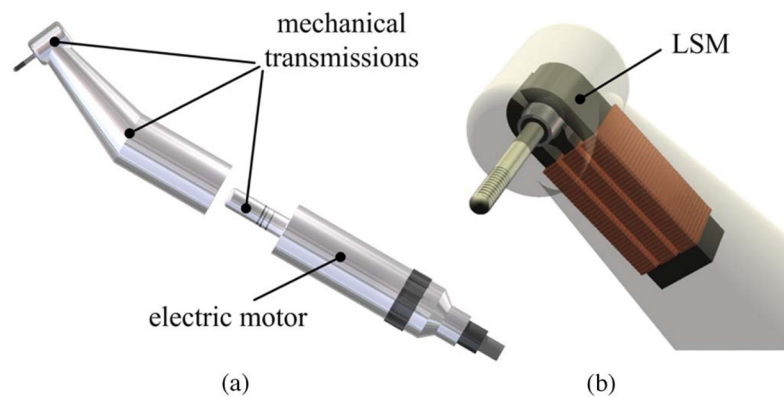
(a) Dental hand piece with a low-speed motor and several stages of mechanical transmission. (b) Direct-driven dental hand piece proposed in [12]
